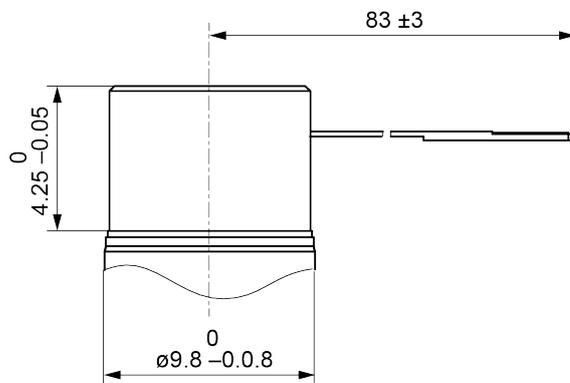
Dimensional Drawing [mm] – ENX 8 MAG
